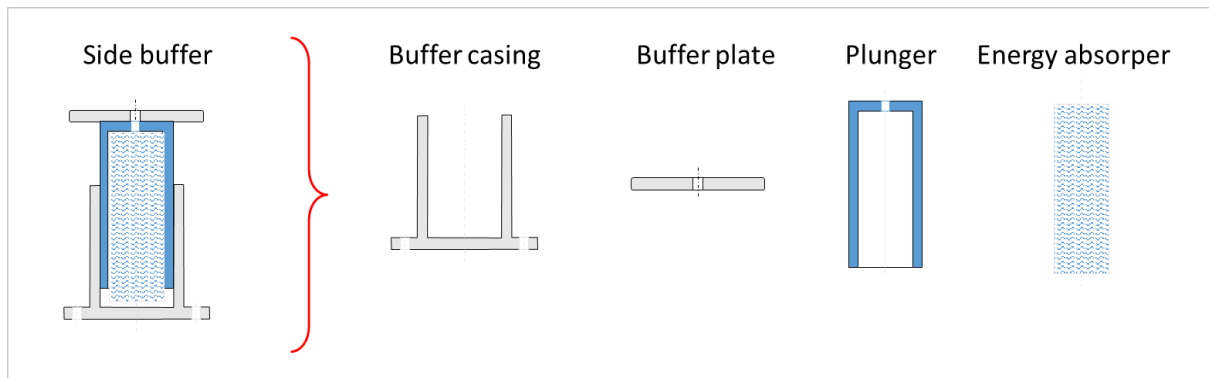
Example: Side buffer (assembly) with buffer casing (leading part)
